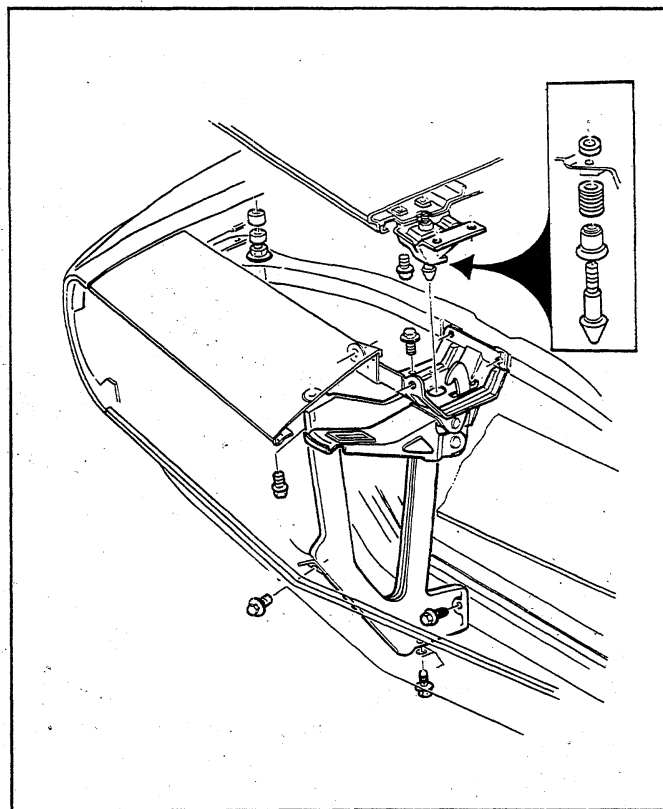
Hood Catch, Support, and Lock Plate - Camaro
